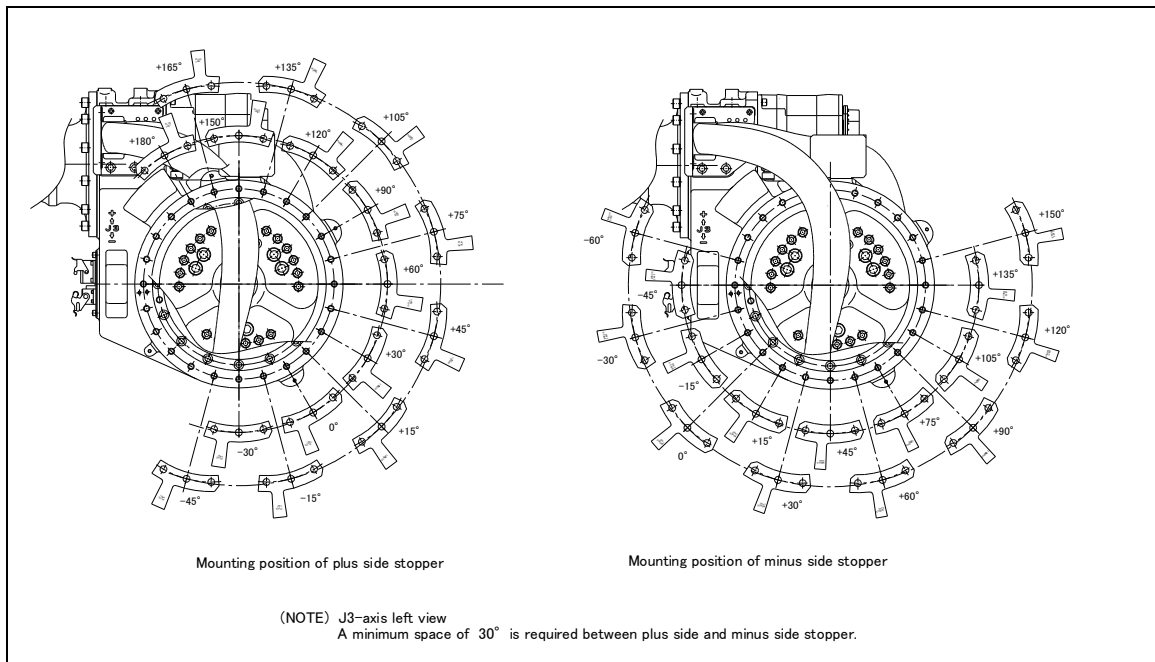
(b) Mounting of J3-axis mechanical stopper (option)
